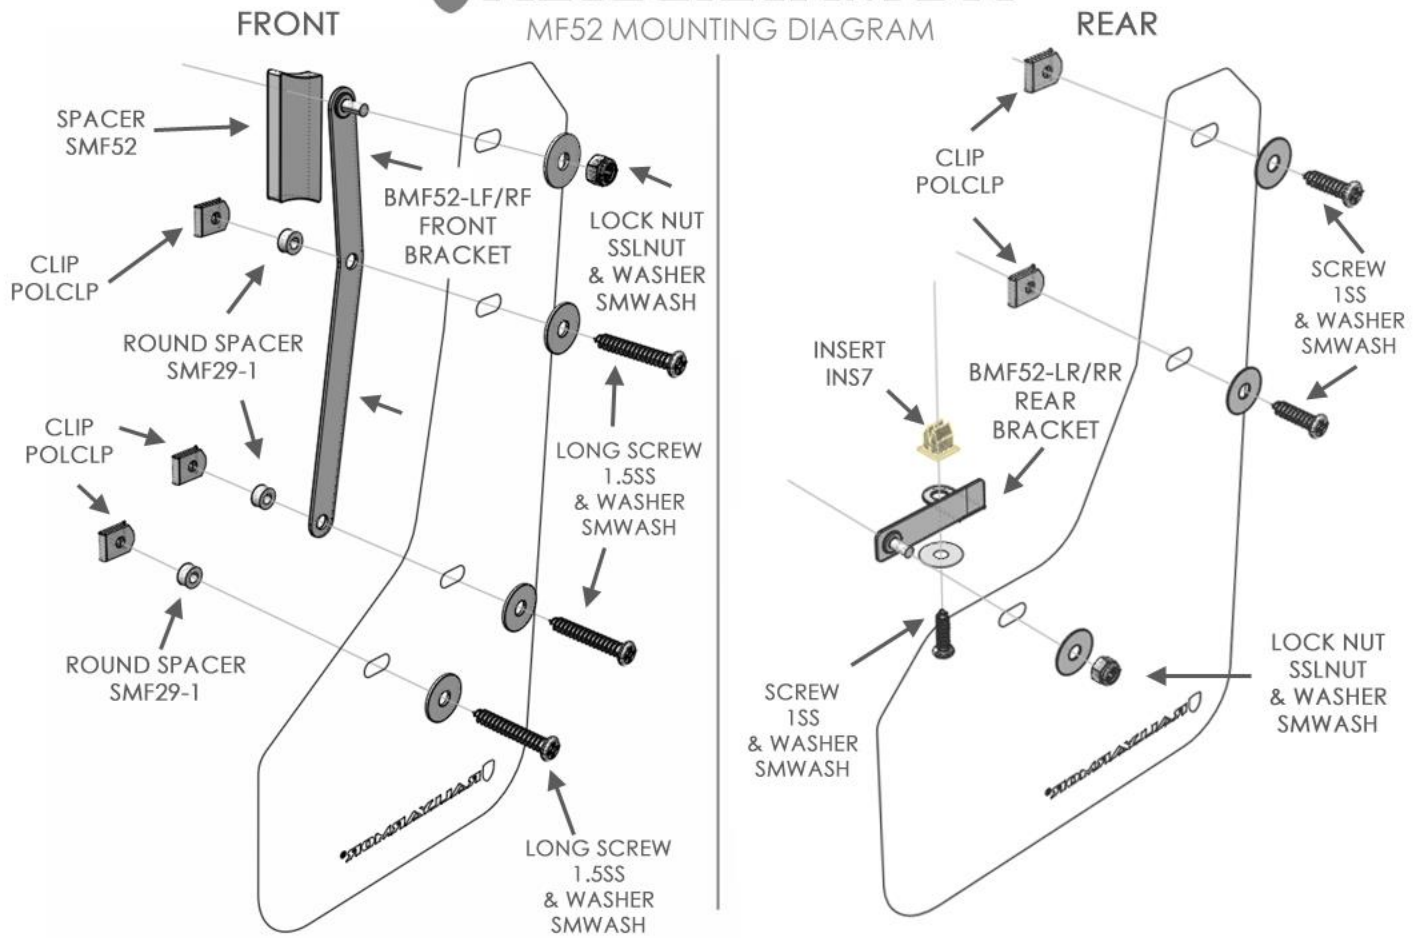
FIGURE L Make slight angle adjustments to flap before hand-tightening fasteners, just until seated.
